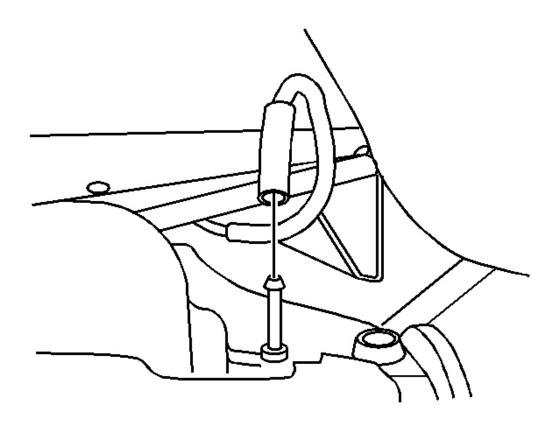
Vent Hose Removed From Rear Axle Courtesy of GENERAL MOTORS CORP.
